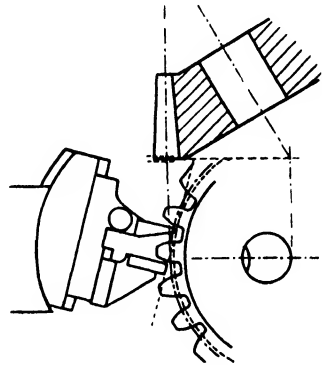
Setting contact fingers at large end of bevel teeth.
